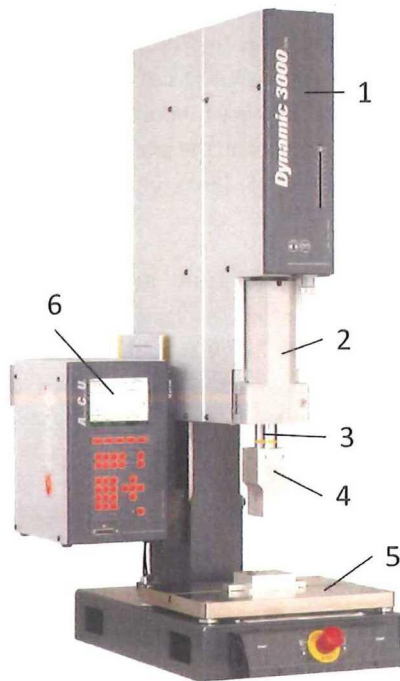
Dynamic 3000 ultrasonic welding machine with generator ACU (Rinco Ultrasonics AG, 2008).
